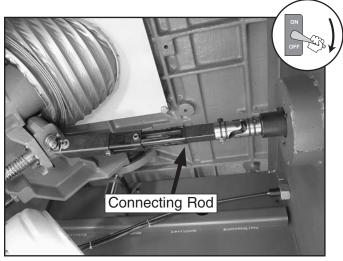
Spindle elevation connecting rod (accessed through the shaper front door).
